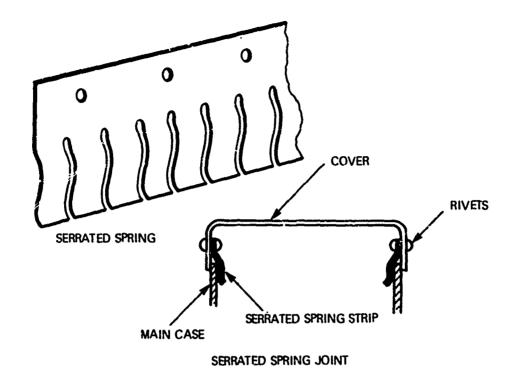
(b) MULTIPLE POINT SPRINGLOADED CONTACT (FINGER STOCK)
